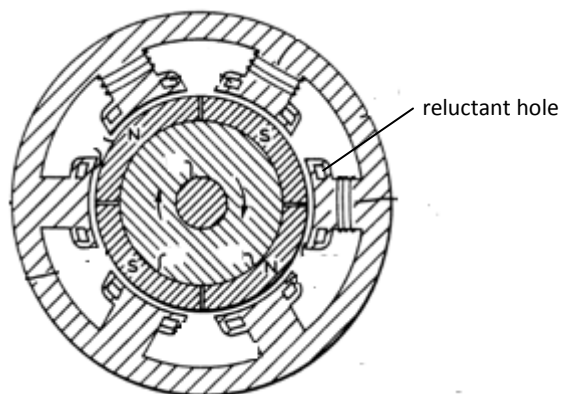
Reluctant hole on stator tooth of a BLDC motor [12]
